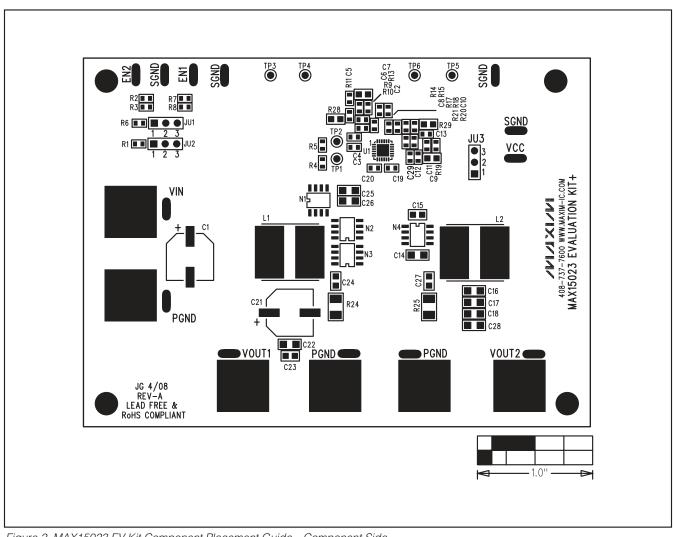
MAX15023 EV Kit Component Placement Guide—Component Side
